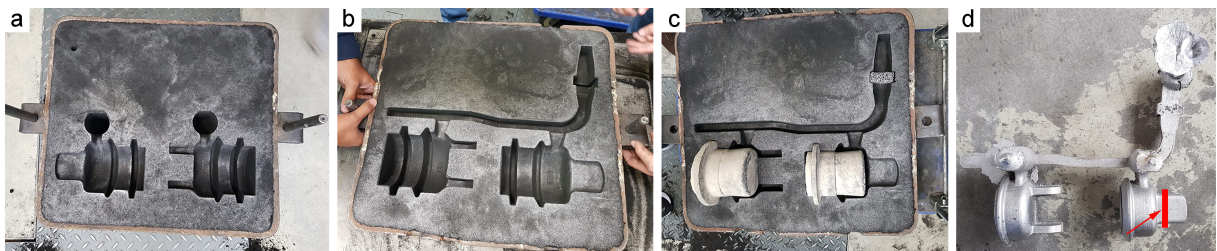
(a) cope, (b) drag, (c) water glass cores and filter placed into drag prior to mould assembling and (d) casting part after demoulding with denoted position for microstructure analysis.
